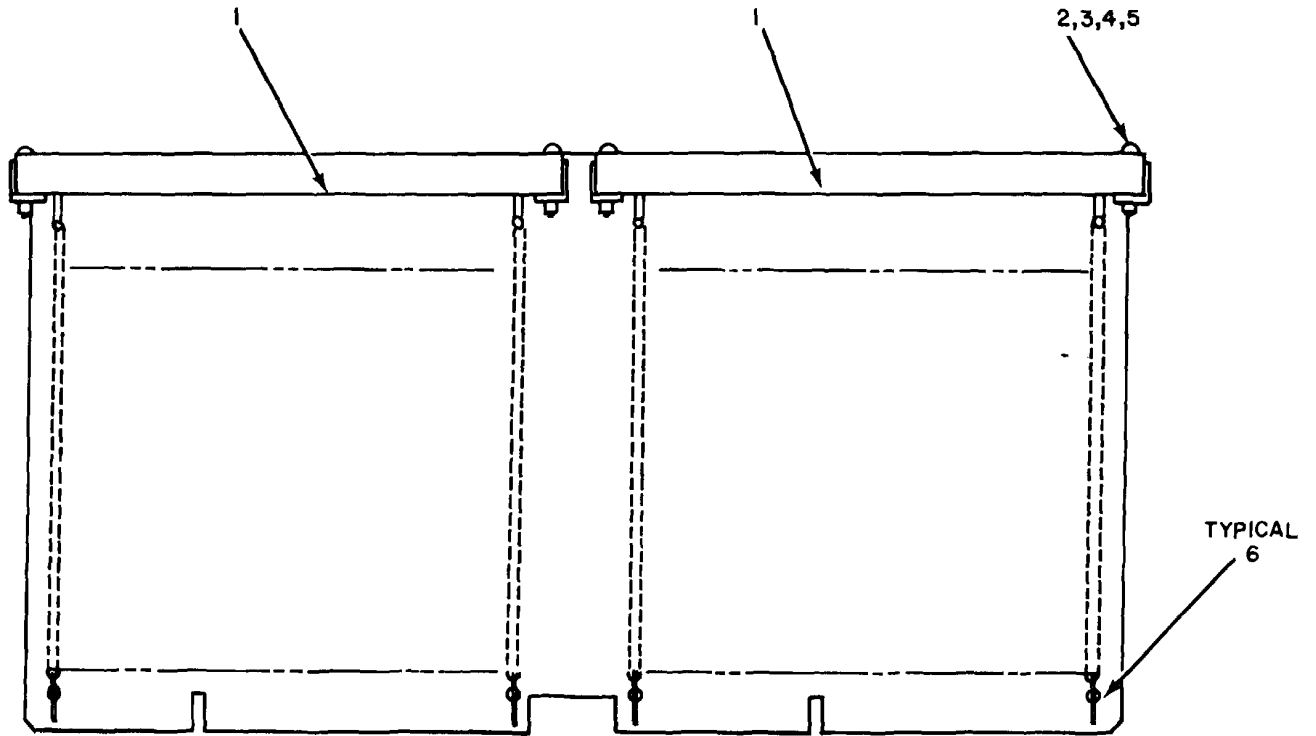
Special Tool, Extender Card Assembly SMD-532026 .
